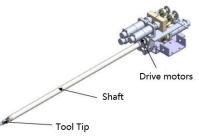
depicts the tool assembly showing drive motors, shaft and tool tip
